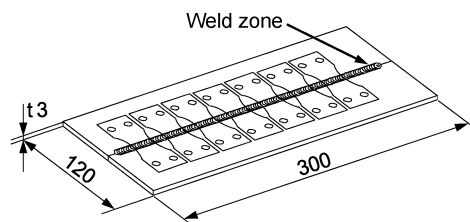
Sampling pattern of fatigue samples from a friction stir welded joint.
